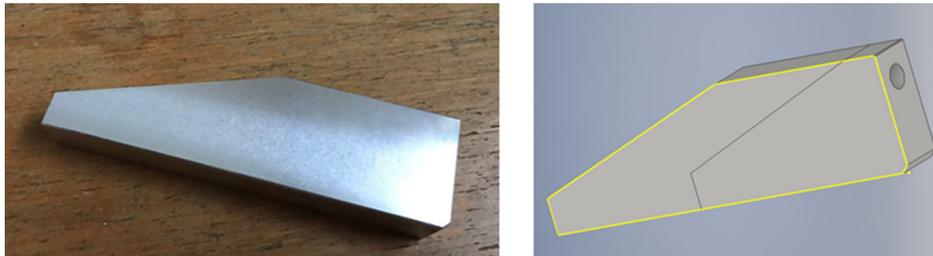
Produced component (left) and built 3D model (right) – EN AW-AlZn5.5MgCu
